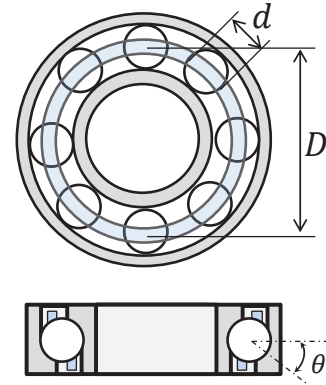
A rolling-element bearing illustrating its geometric parameters.
